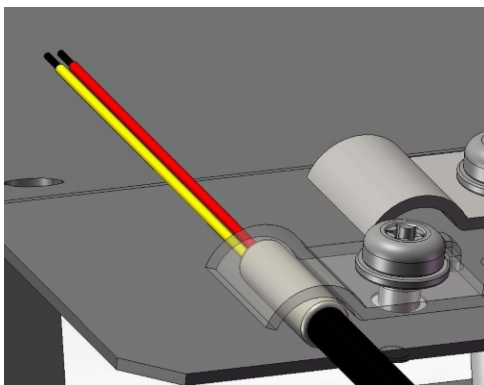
Thin Shielded Cable (cable shield is folded back over the jacket)
